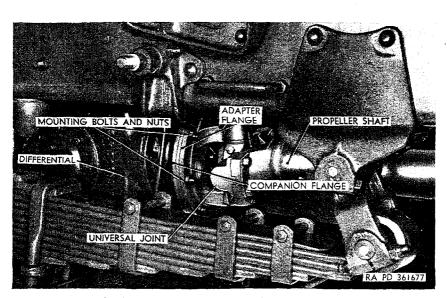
Disconnecting transfer-to-front-axle propeller shaft.
